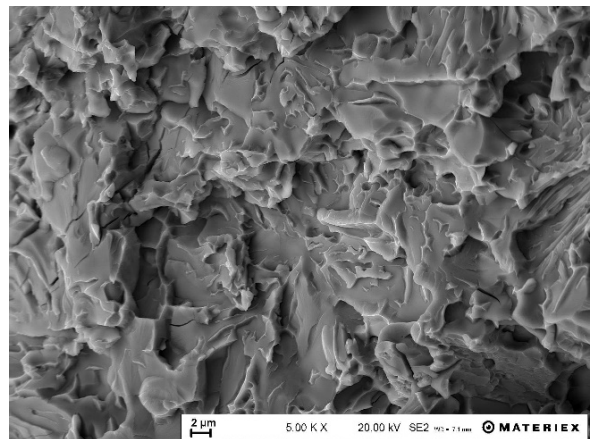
Brittle cleavage mode of fracture, fractured flange.
